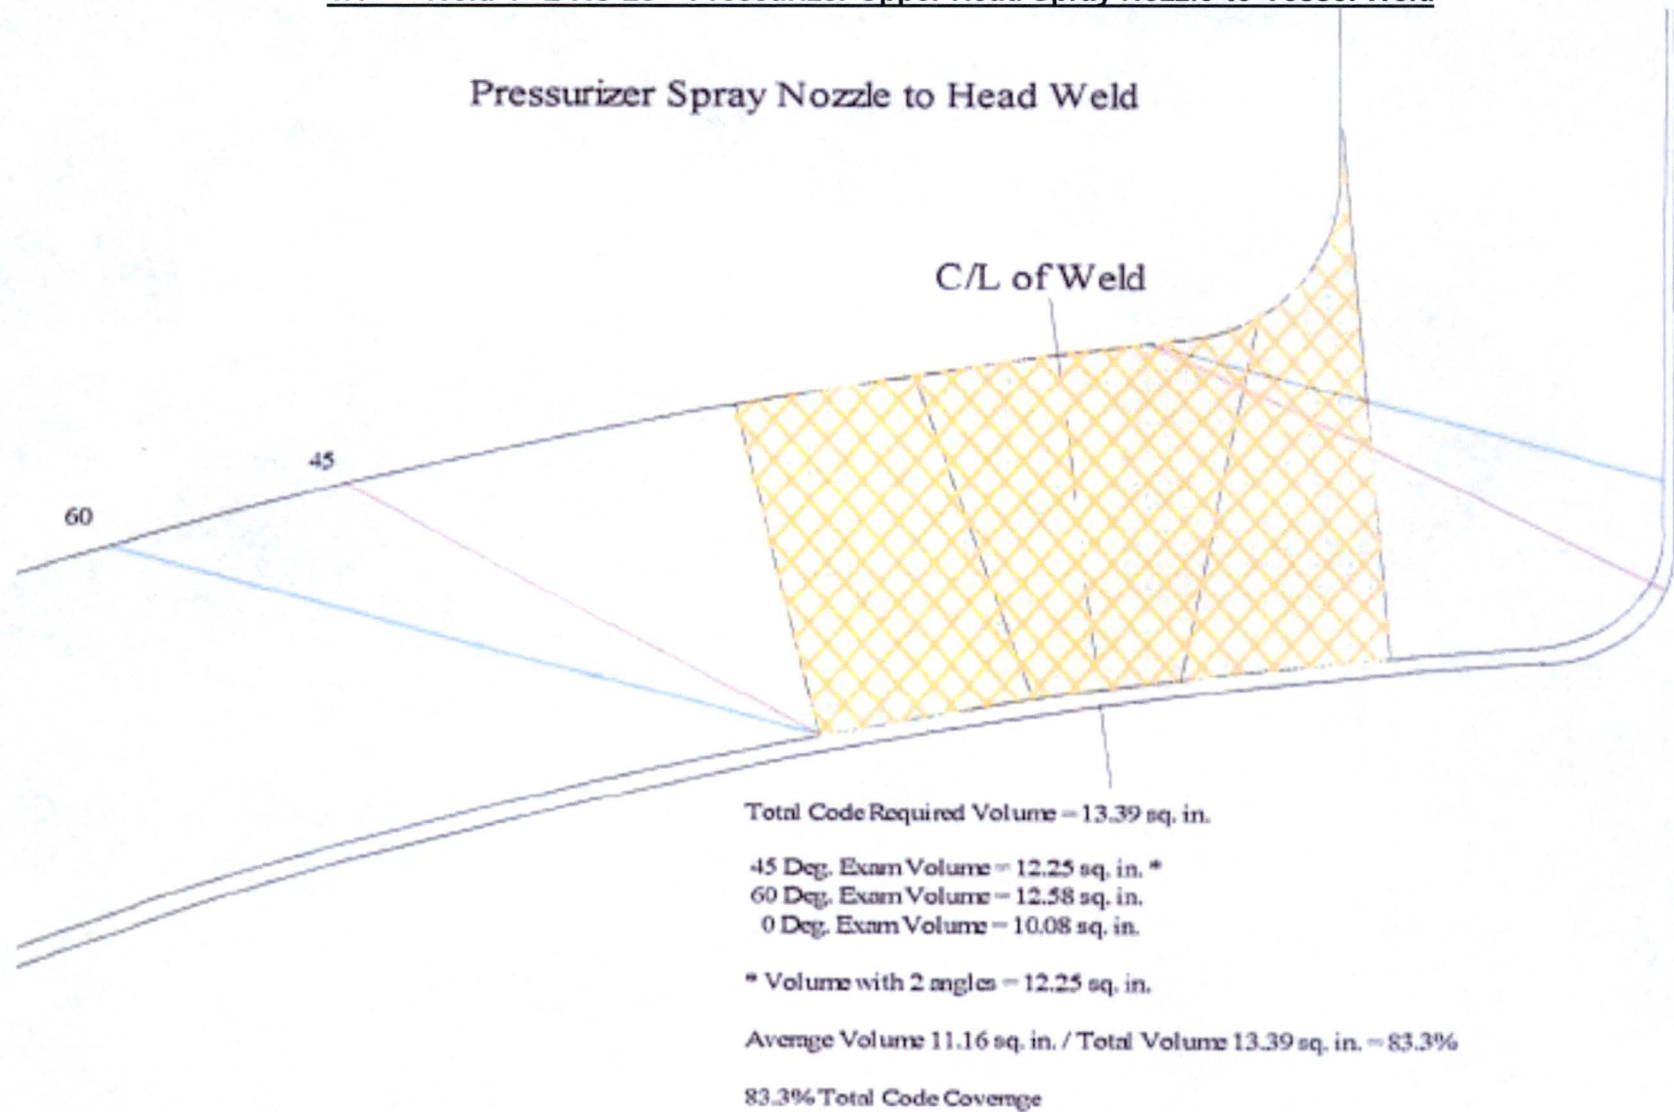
Weld 4"-2-RC-28 (Extracted from Reference DRAWING 2A-4)
